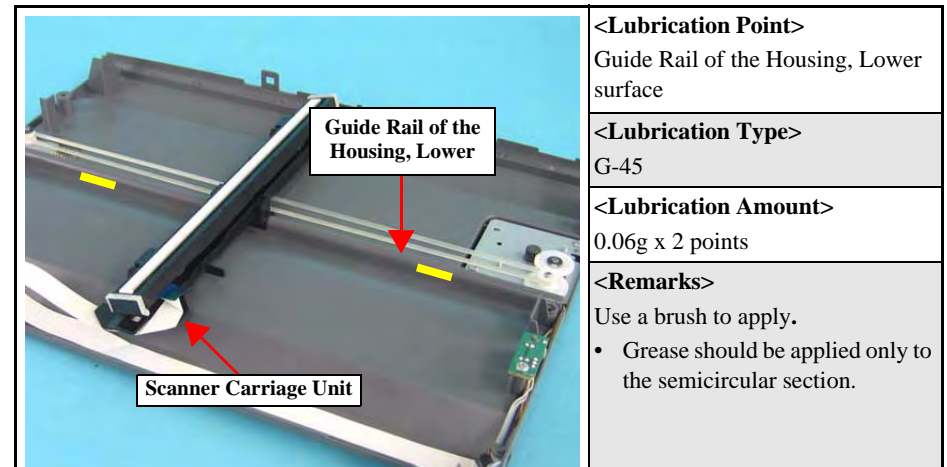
Lubrication on Guide Rail of the Housing, Lower Surface
